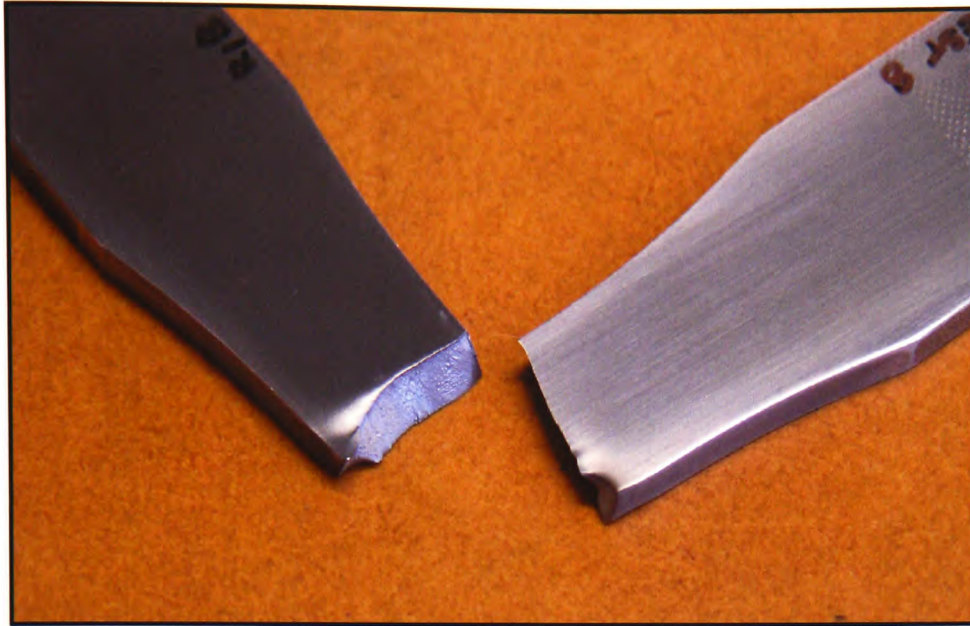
A control specimen which has failed in fatigue - view of tear
